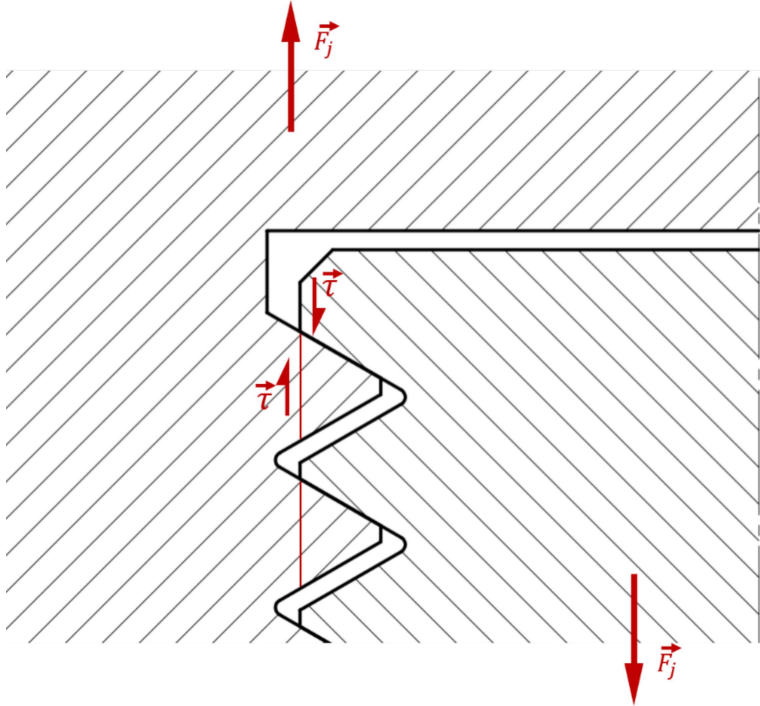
Shear Stress in the Thread Fillets fo the Bolted Connection
